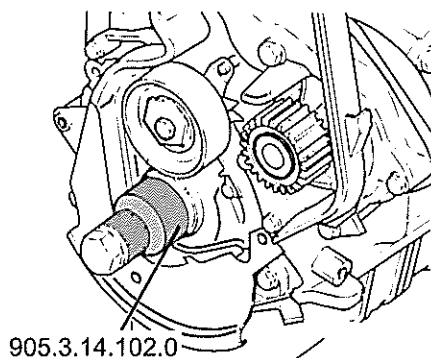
Crankshaft oil seal – belt pulley end (refitting)
